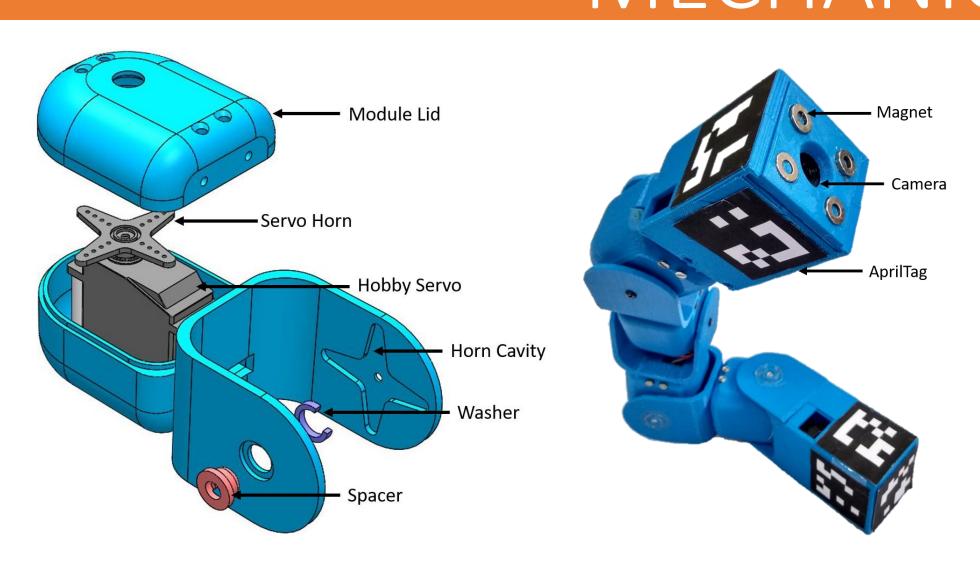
(a): Exploded view of module (left) and fabricated snake robot(right)
